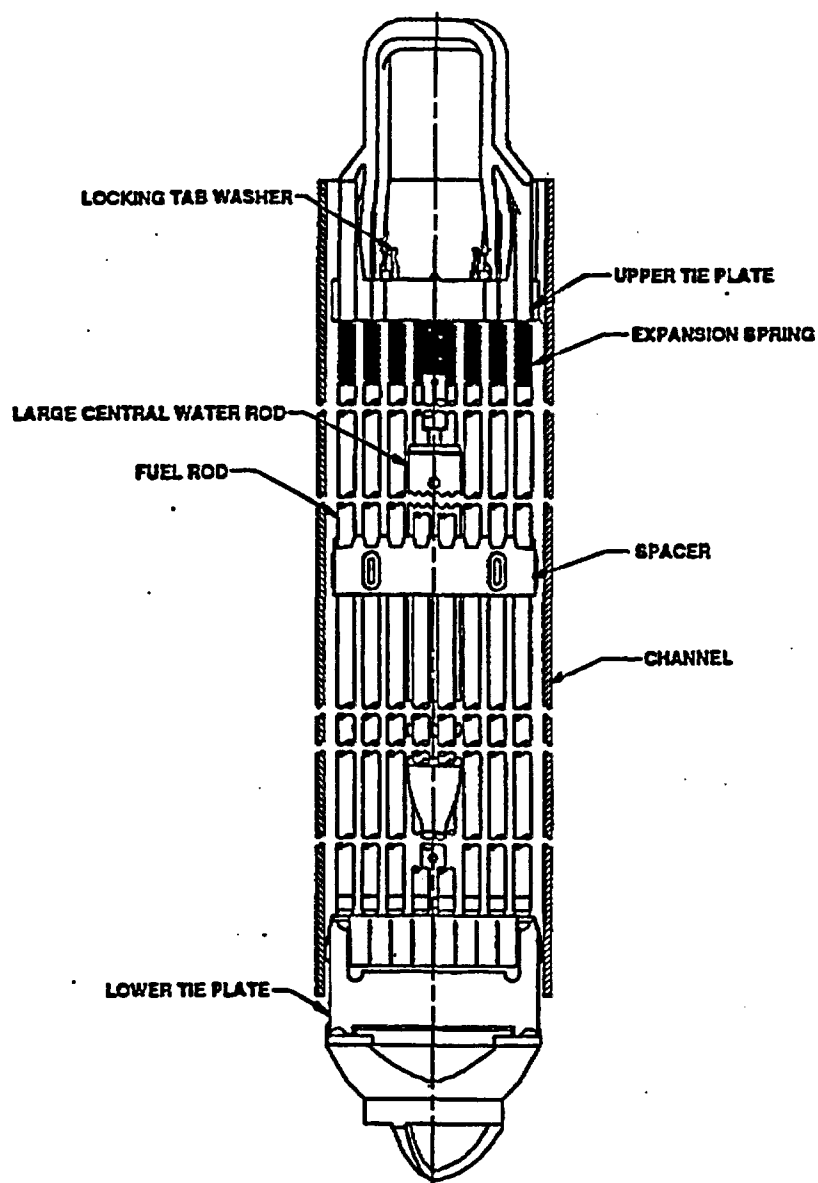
LS1 GE 8x8NB Fuel Assembly
